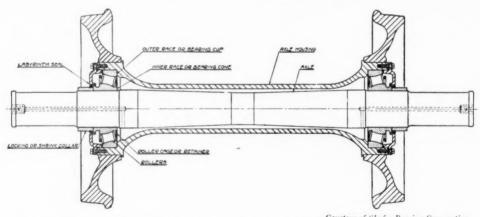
Sectional drawing of an A. S. F. roller bearing unit showing Shafer self-aligning roller bearings and the details of construction with respect to lubrication.
